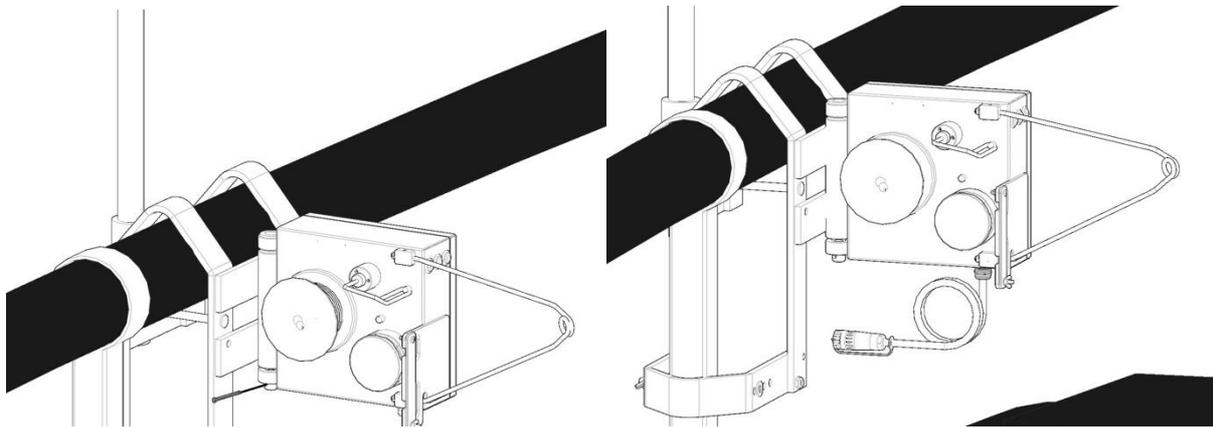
Secure the locking bolt for the winch with the split pin and lead the cable back to the CIU
